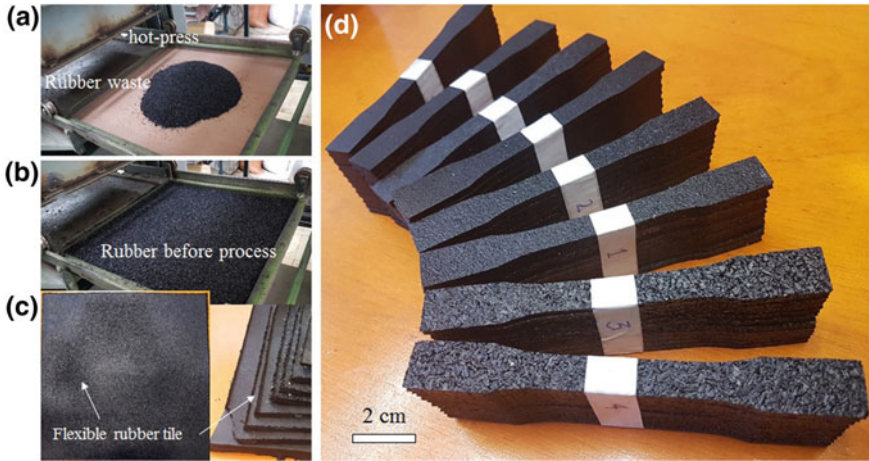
Flexible tile fabrication, a hot press and rubber waste batch, b rubber particles with the binder on the mold, c flexible tiles after the processing, d samples ready for the tensile tests
